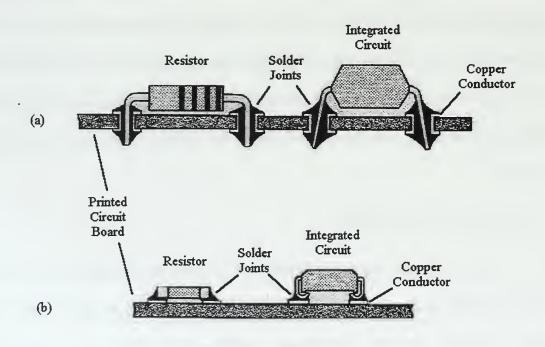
Mounting Techologies: (a) Thru-hole, (b) Surface Mount [Ref. 49]
